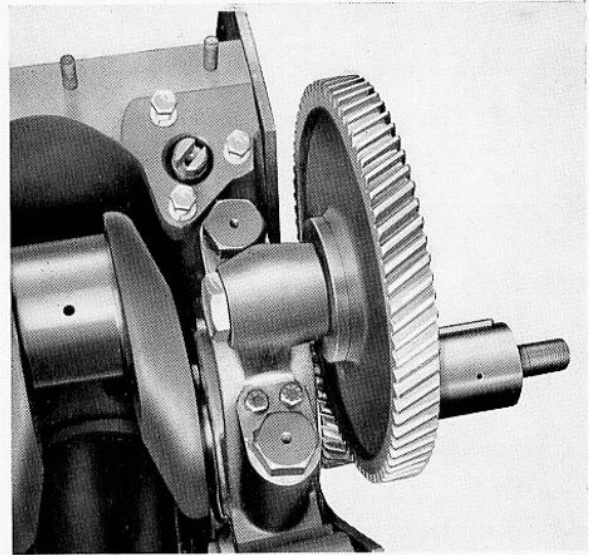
IDLER GEAR IN POSITION—HORIZONTAL ENGINE
